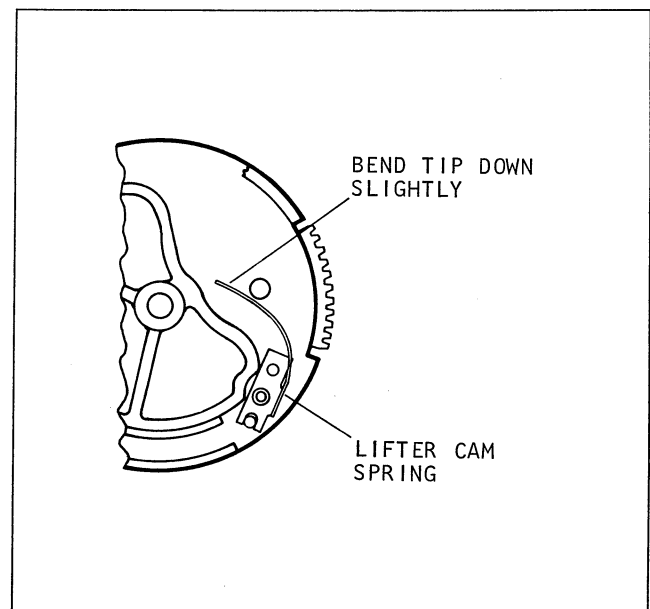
Figure S. Adjusting the Lifting Cam Spring (Early Models Only)
